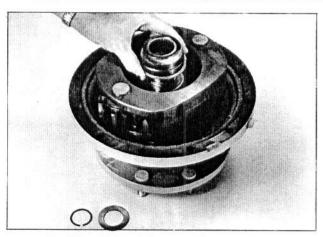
Spherical Bearing and Thrust Bearing Removal or Installation
